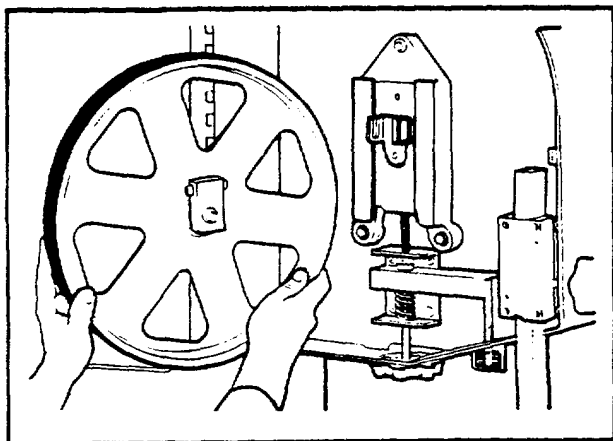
UPPER WHEEL REMOVED TO SHOW HEAD ASSEMBLY DETAIL
